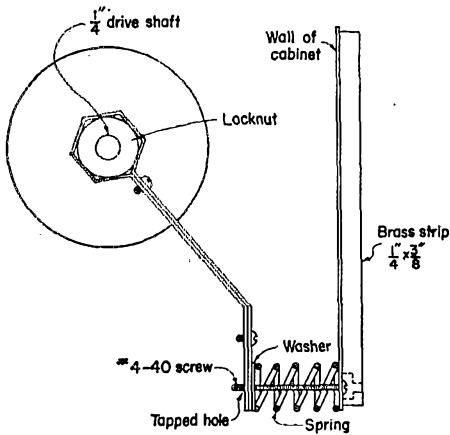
Details of the tension adjustment for the lock nut on the crystal-mixer tuning assembly.
